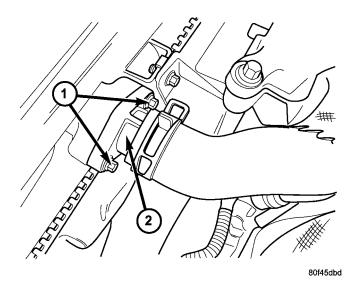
Radiator Inlet Neck - 2.4L Turbo
